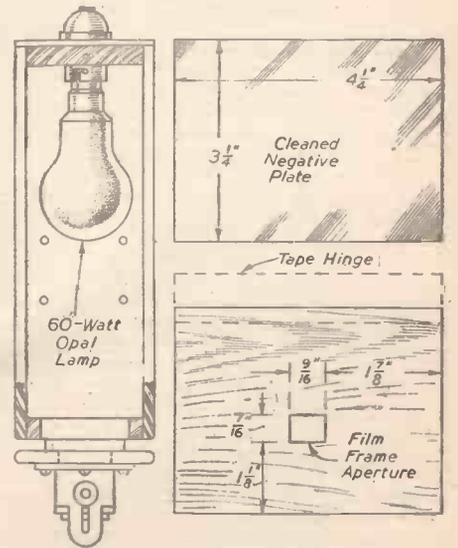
Part sectional view of lamp house with front removed to show interior, with negative carrier parts.
